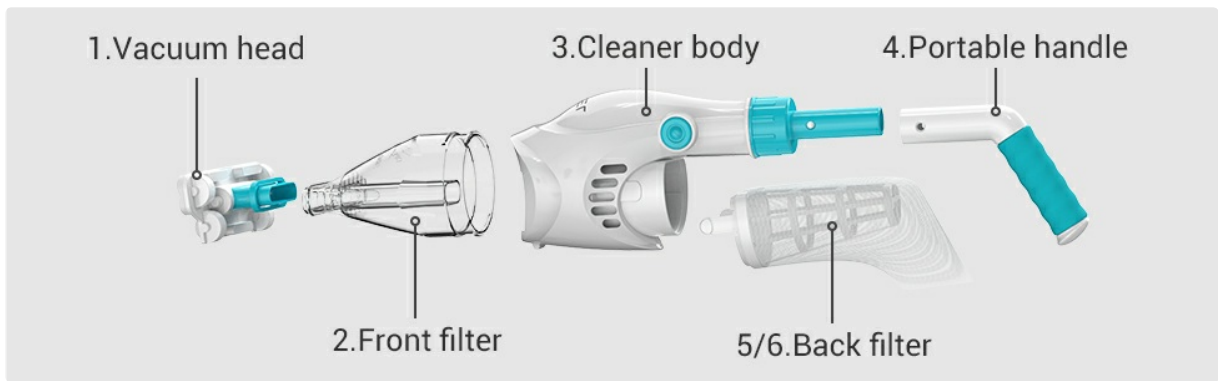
Exploded view of the AIPER P1111 Handheld Cordless Pool Vacuum showing its main components.
